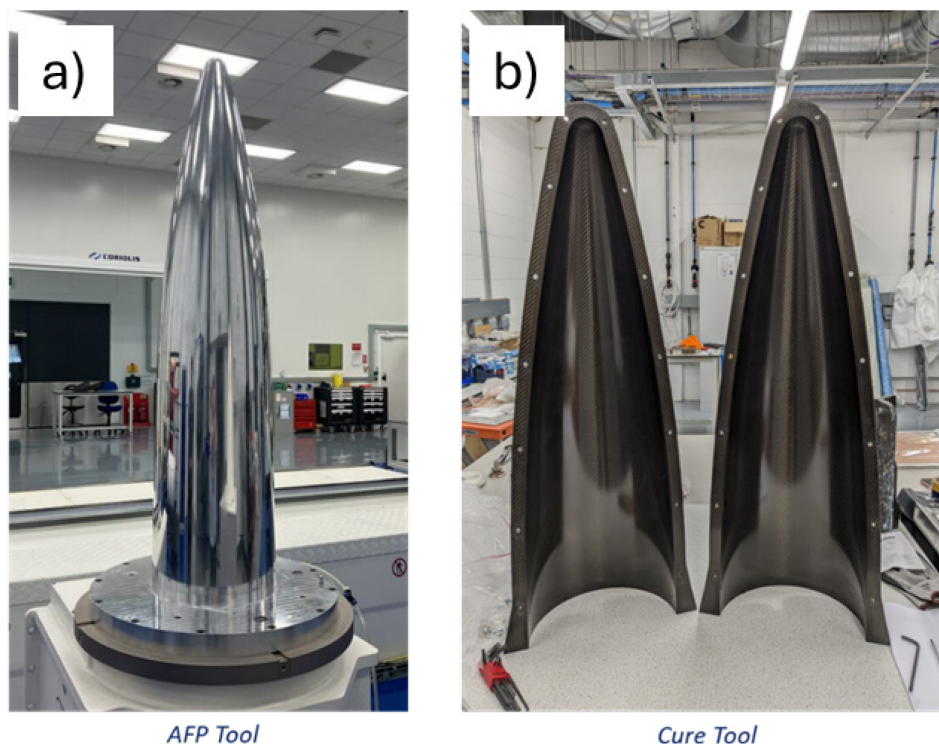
Tools developed for the research: a) AFP deposition tool and b) autoclave consolidation tool.
